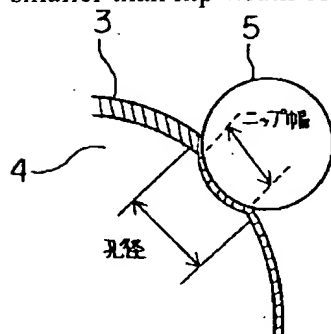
The cross section of the nip-roll pressure-welding section with a larger aperture than nip width of face.
